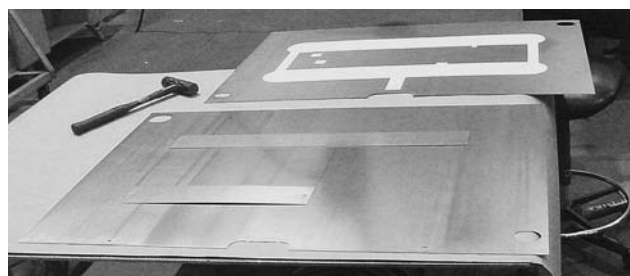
Remainder of paper has been removed and pack is ready for assembly and welding 125 μ m
